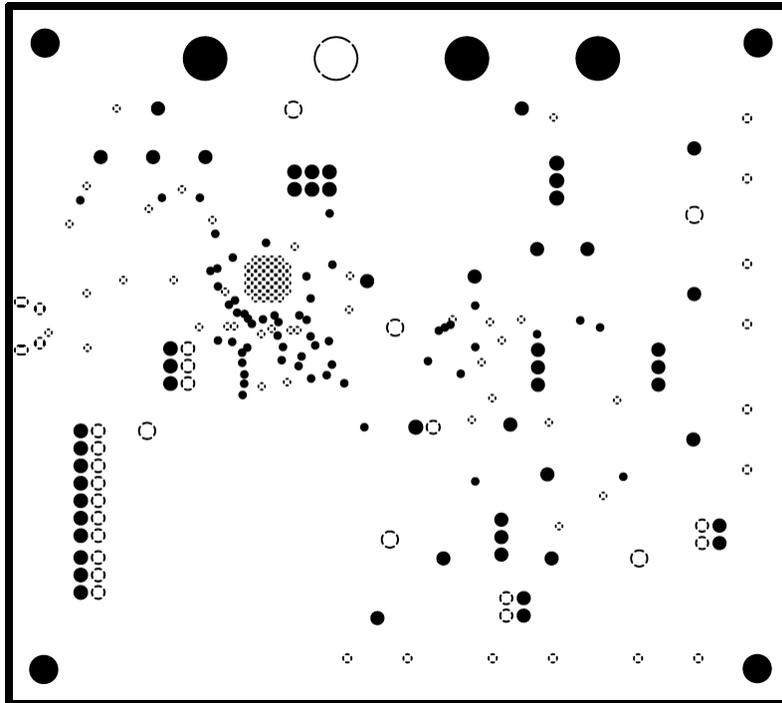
AFE881H1EVM PCB Mid Layer 1 Layout (GND Plane)
